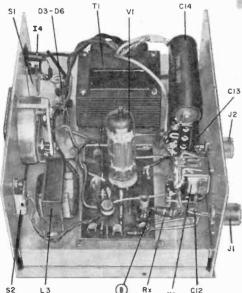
With cabinet wrap-around cover removed from unit, the completely assembled "Mule Box" should look like this. Note positions of major components.
